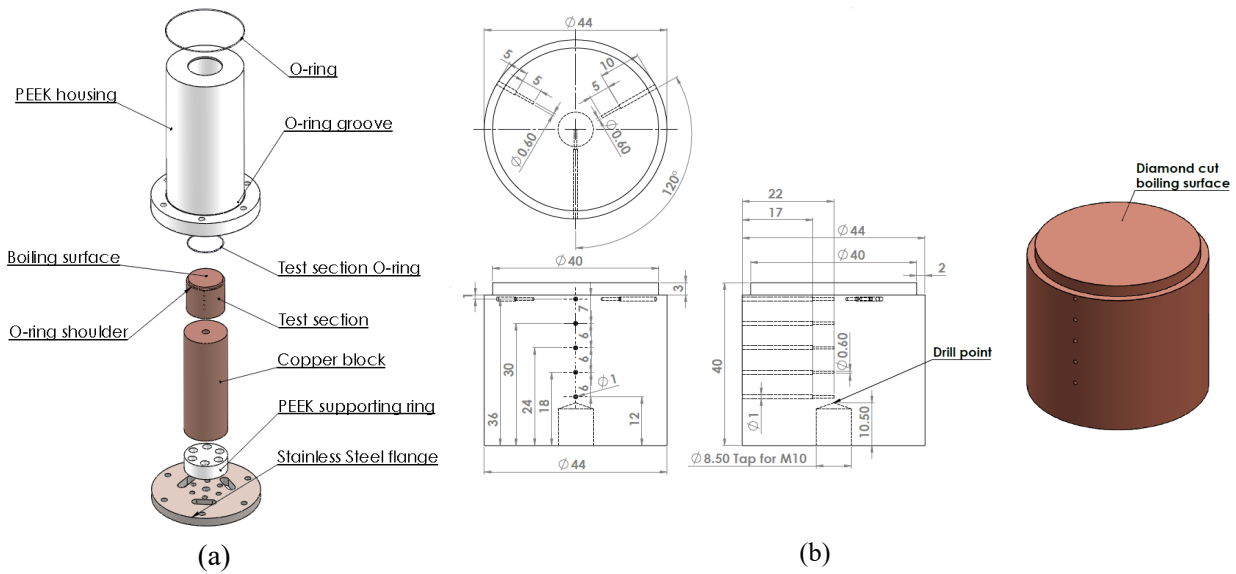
CAD drawings of the (a) test piece, (b) heat sink, dimensions in mm.
